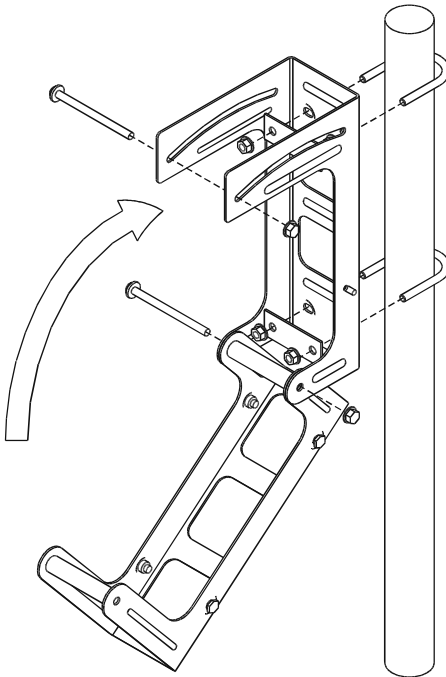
CU232 Mounting Bracket Fastened to Pole
